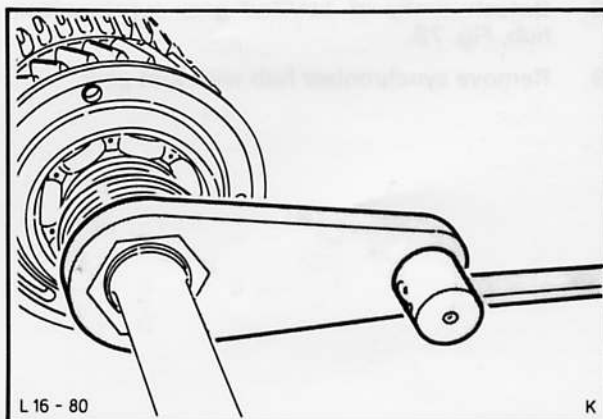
Remove mainshaft nut with Special Tool No. 16-027
